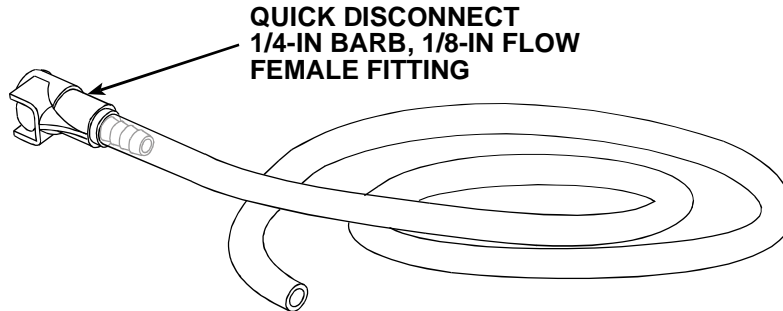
Ink Tank Return Tubing Assembly (9600-784)
